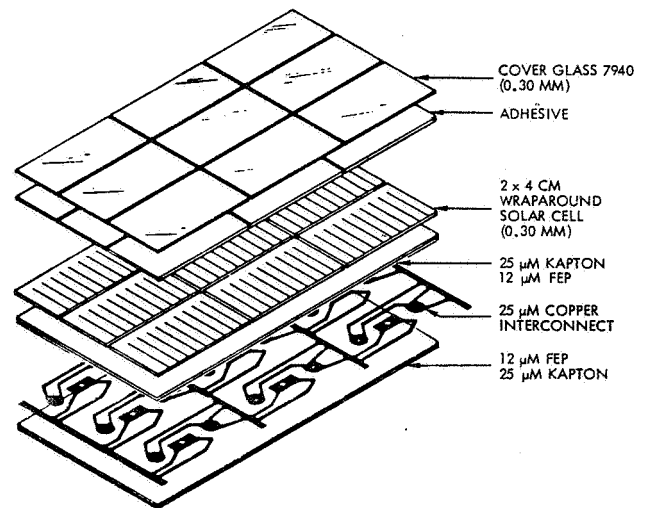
Space Station Substrate Assembly (Exploded View) (Ref. 6.2-19)
